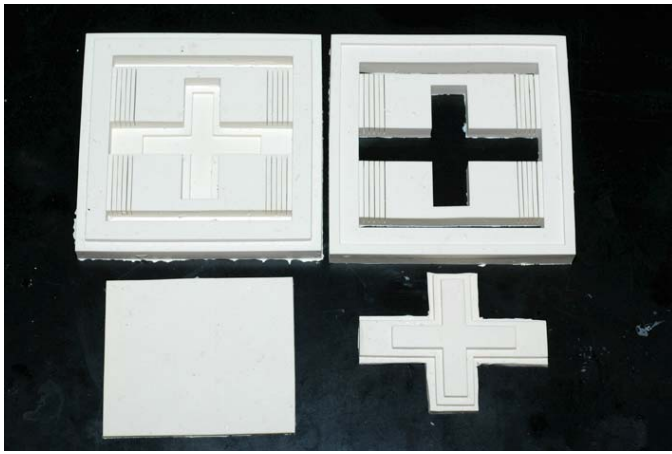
Two sided PDMS mold for molding a single DOF bearing module
